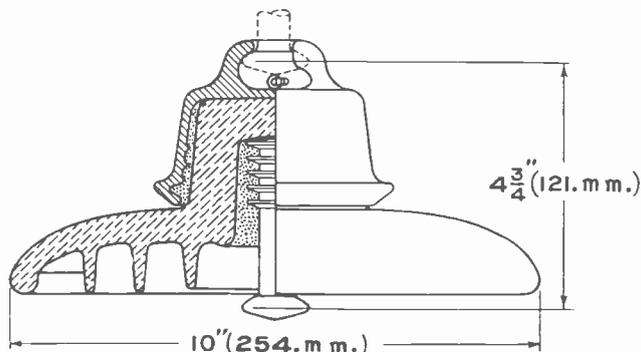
Sectional view of a suspension type insulator unit showing how the metal cap and pin are securely cemented to the porcelain insulator disk. Courtesy Ohio Brass Co.
